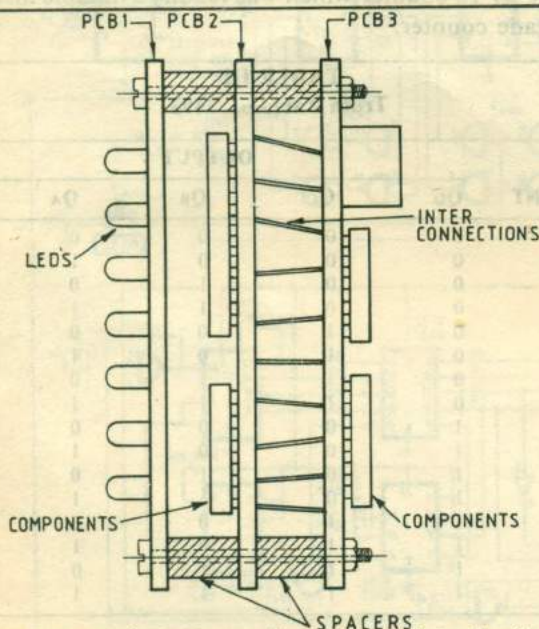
End view of the composite clock module showing mounting of the third PCB.
